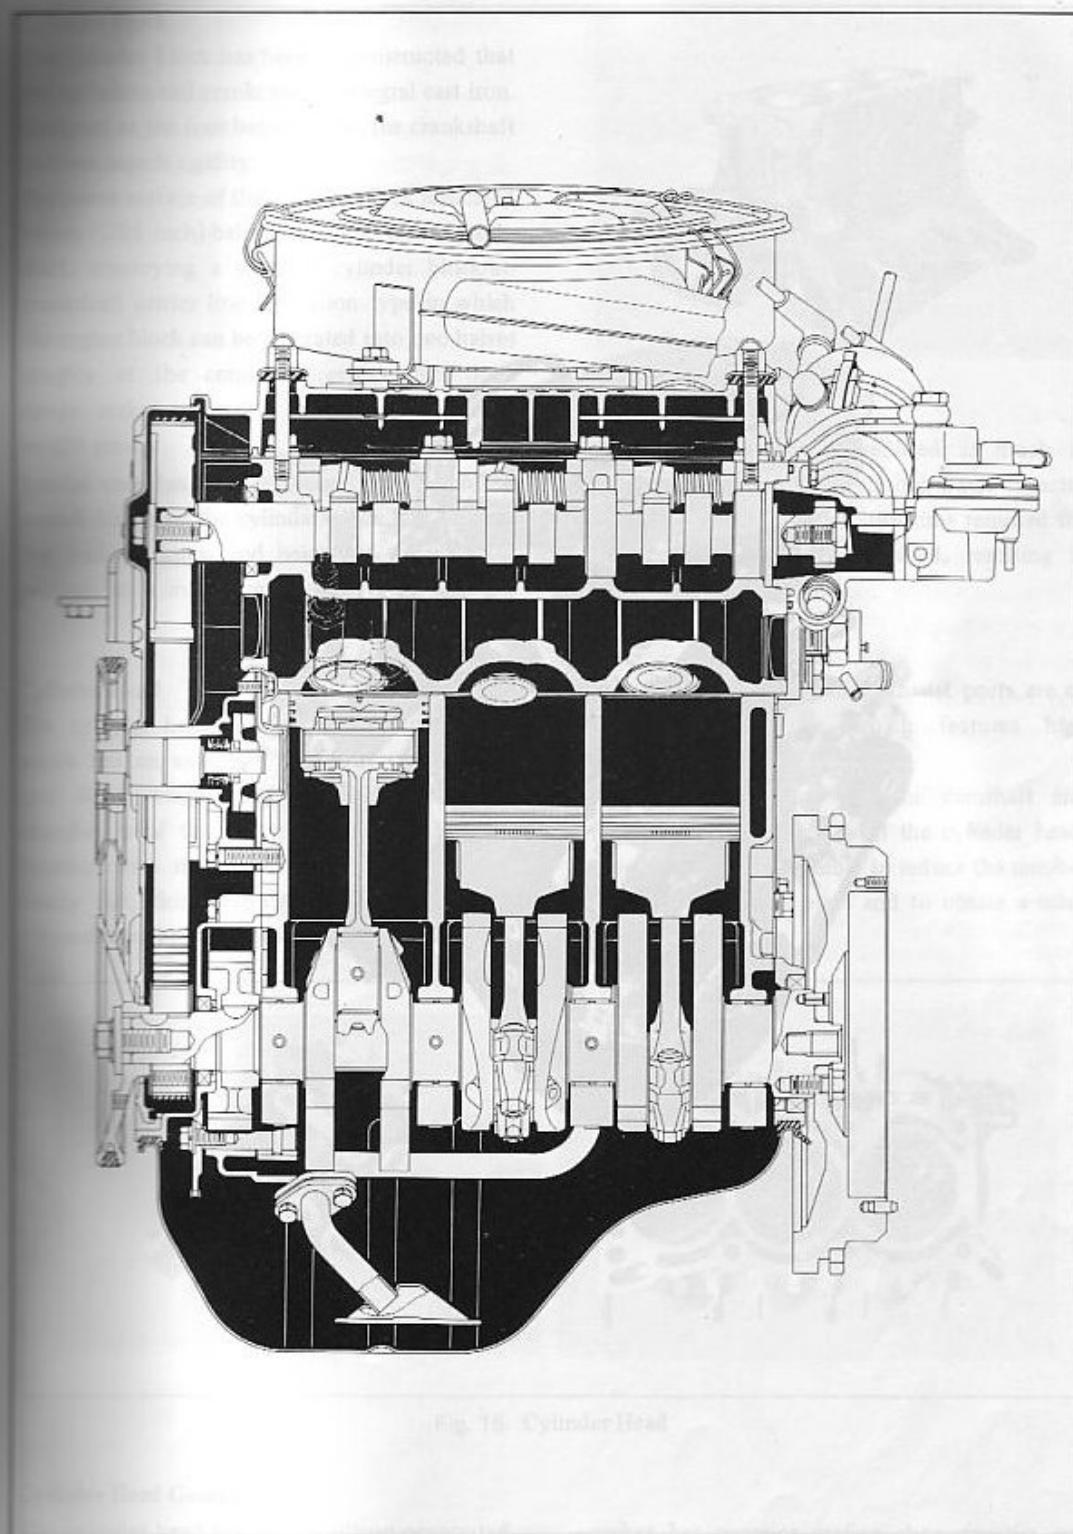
Transverse-Sectional View of Type CB20 Engine
